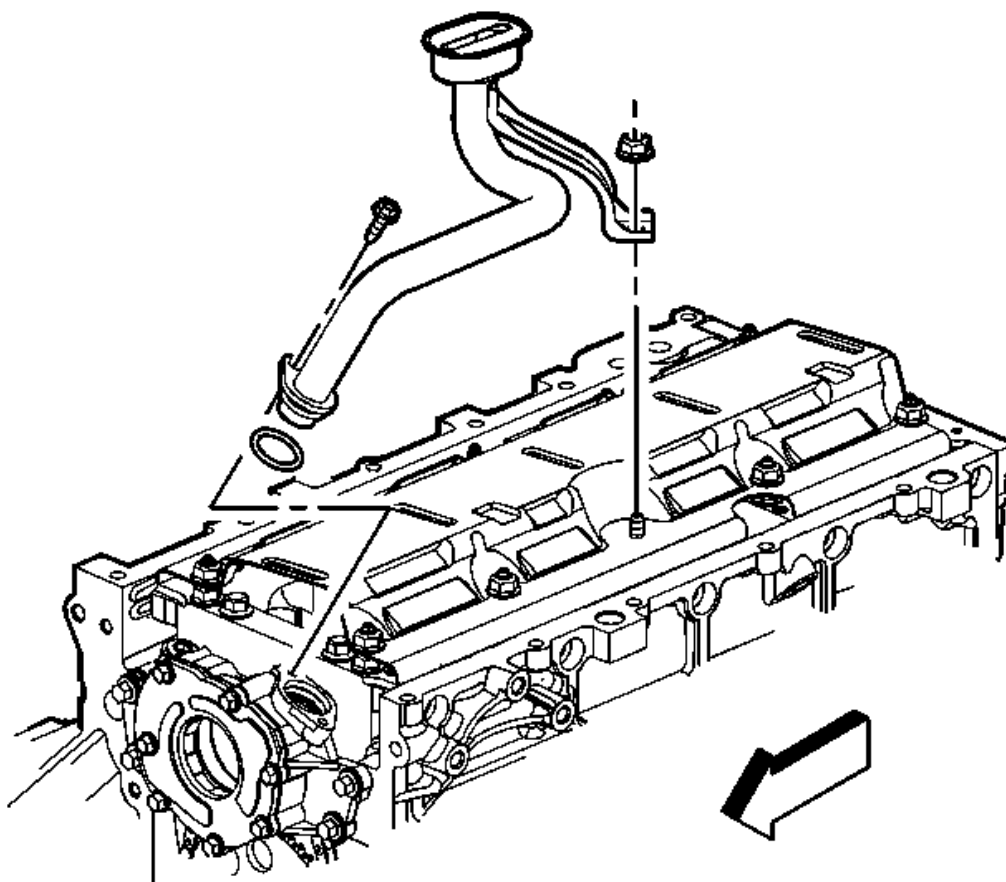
View Of Oil Pump Screen, Bolt & Nuts
